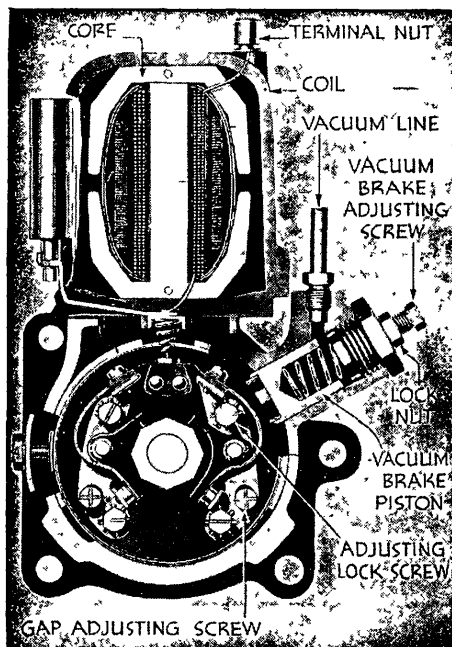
Ford vacuum brake type distributor, 1937-41 V8
